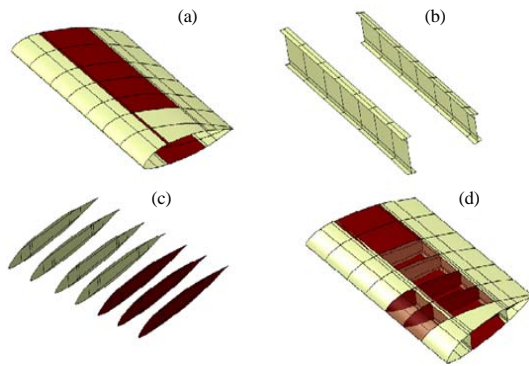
Geometry of wing components: a) Shell; b) Spars; c) Ribs; d) Assembly of parts in form of lambda wing
